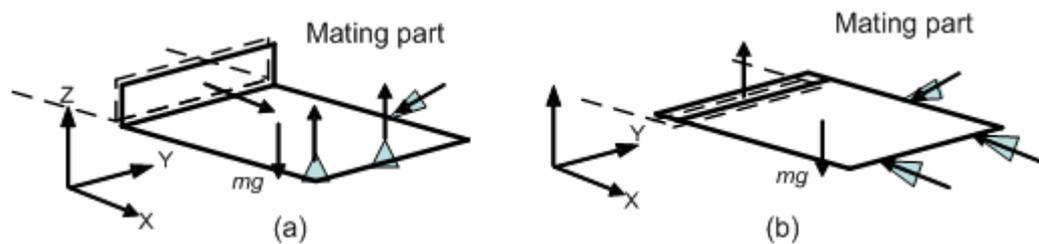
The impact of part-to-part joint selection and fixture layout designs, (a) butt joint, and (b) lap joint.
